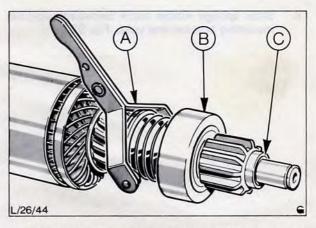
Actuating fork – 'A', pinion/Clutch assembly – 'B' and thrust collar/'C' clip – 'C' in assembled position
